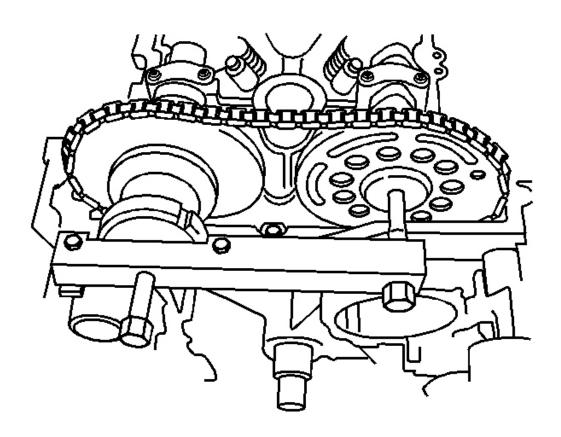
View Of J 44222 Installed Onto Cylinder Head Courtesy of GENERAL MOTORS CORP.
